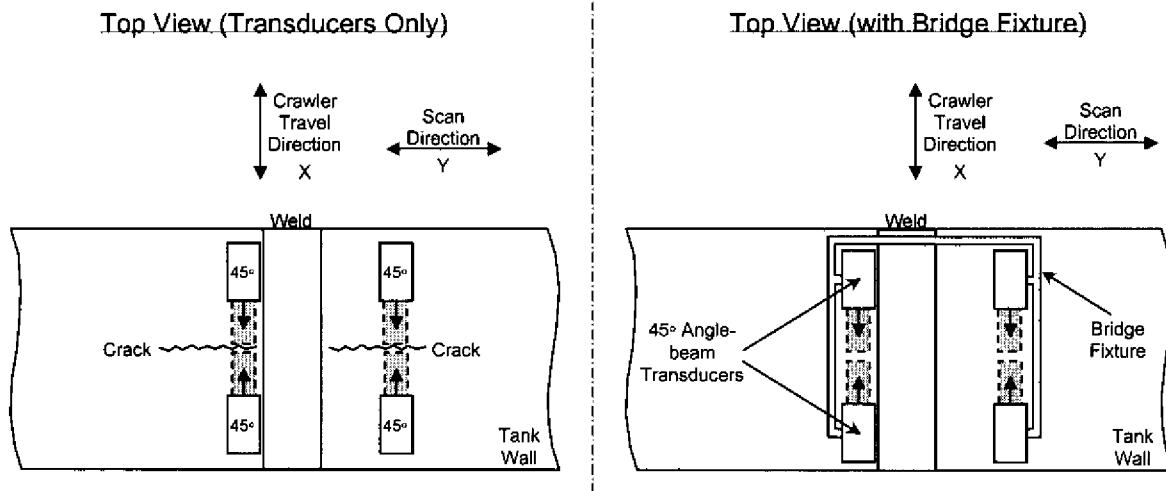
Schematic of UT Setup for Second Pass of Weld Inspections
